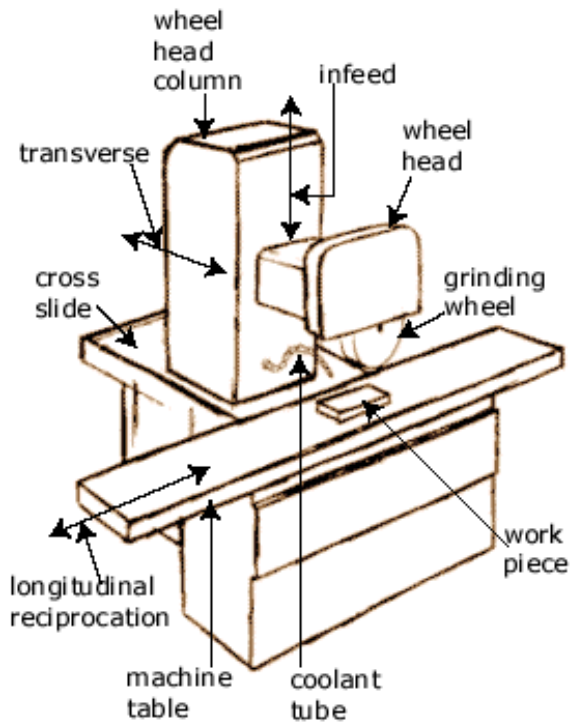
Left:* Schematic of horizontal spindle grinder.
